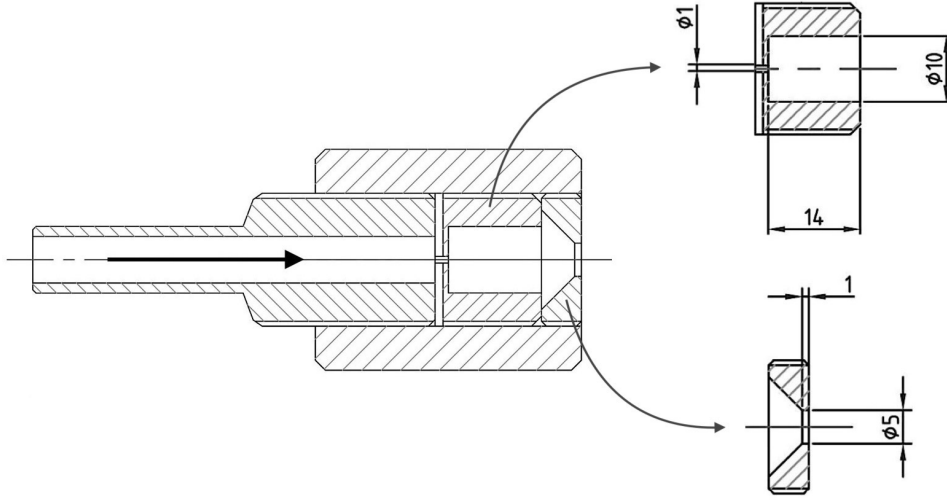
Modified supply nozzle modular design (dimensions shown in mm), based on a design originally conceived by Professor Paul Cooper of the Faculty of Engineering, University of Wollongong, NSW, Australia.
